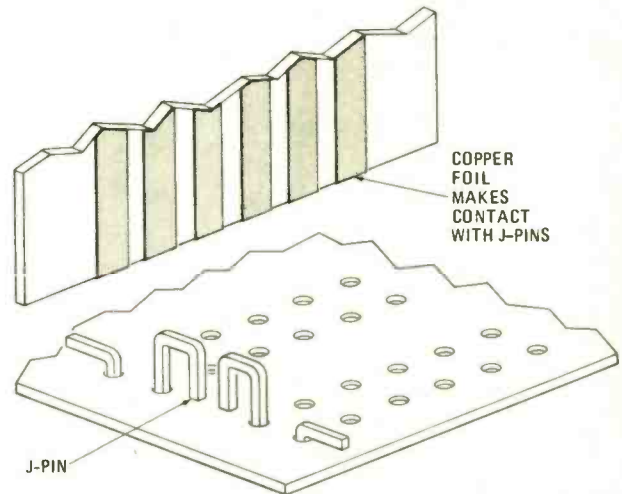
HOW J-PINS CAN BE USED as edge-connector socket pins for a PC board.
